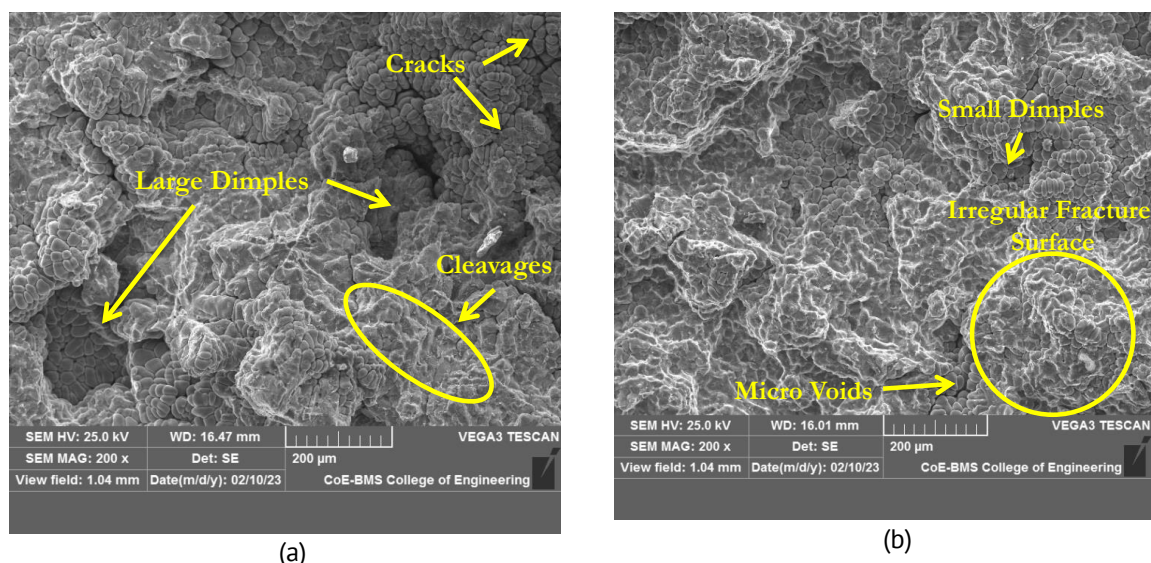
Fracture surface of (a) base alloy and (b) 2.5 % n-TiB₂ composites
